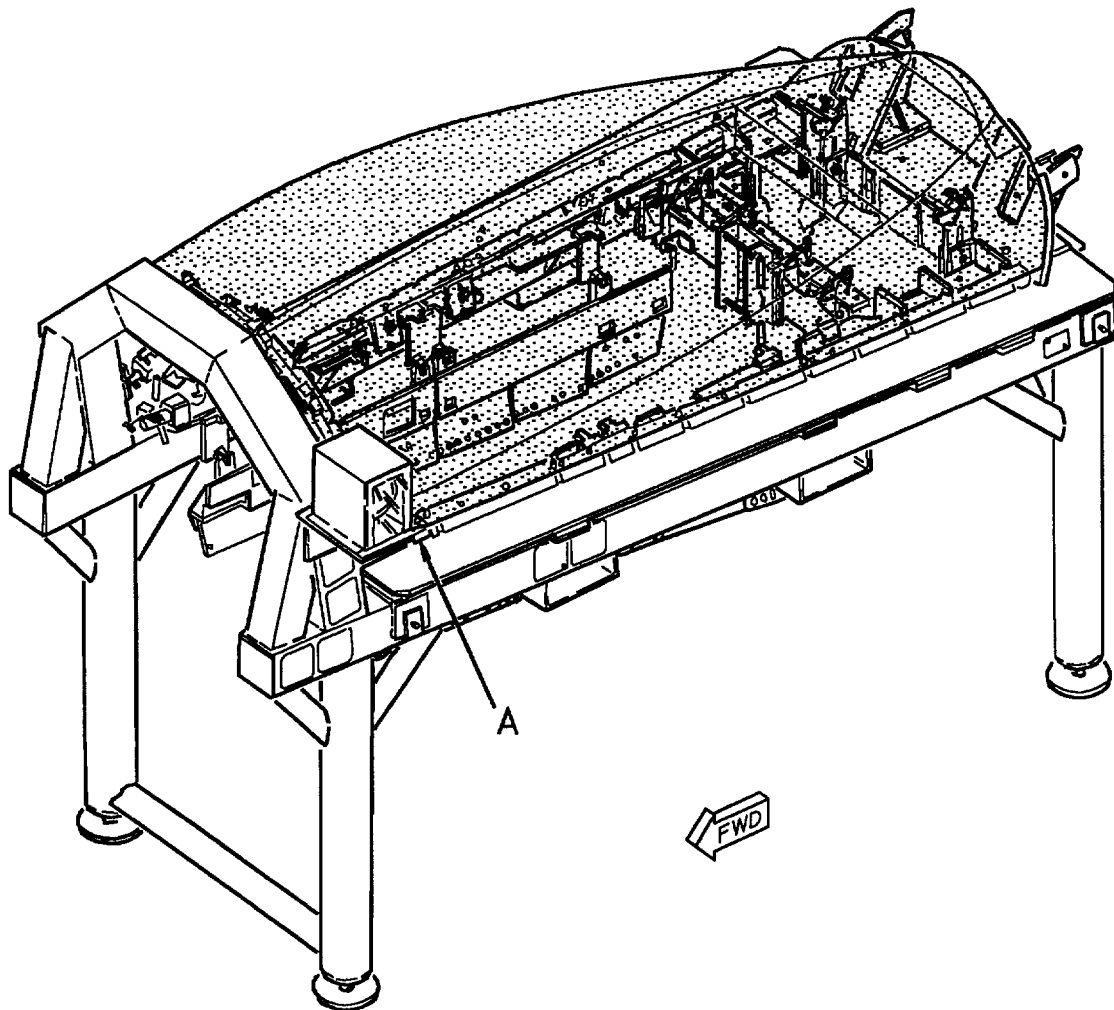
Inspection or Replacement - Side Seal Retainer (Sheet 1)
